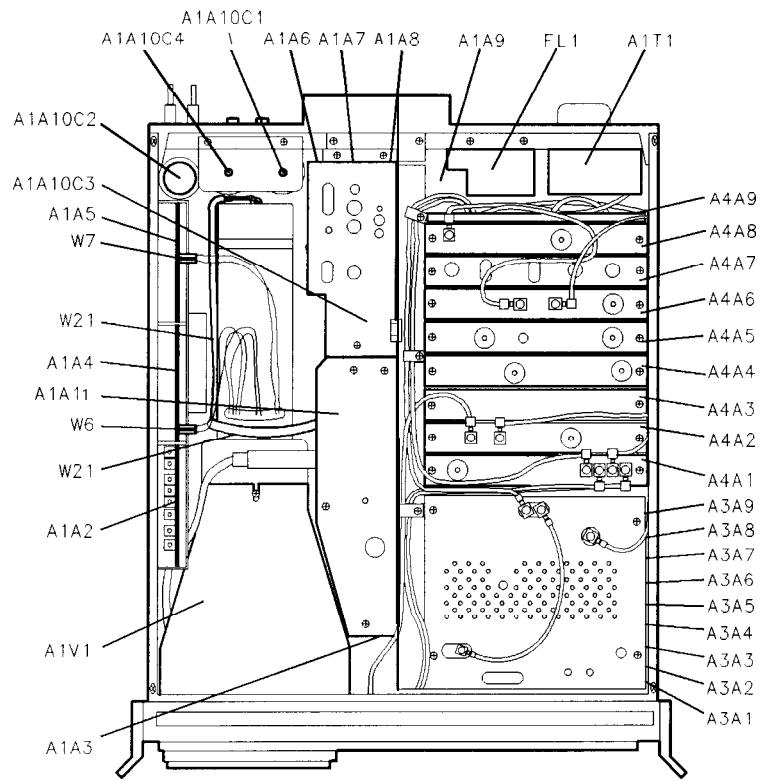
IF Section, Top View (SN 3001A and Below)
